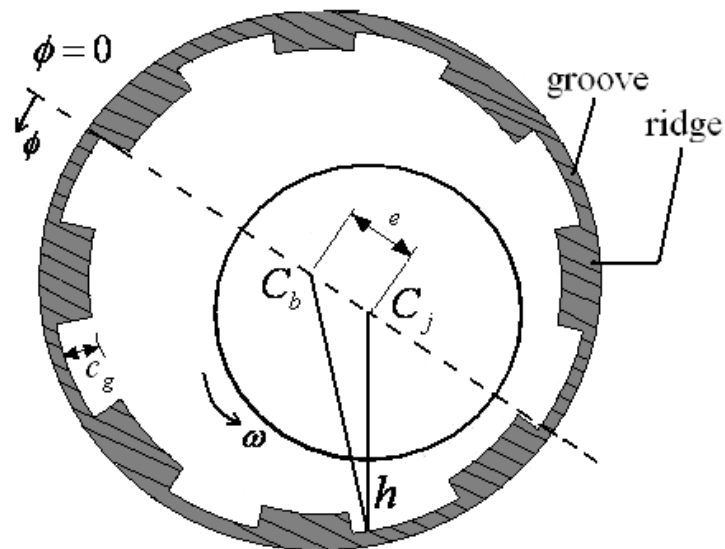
Sketch of the fluid thickness for grooved bearing
